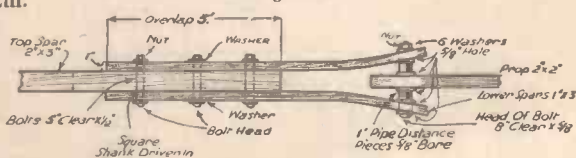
Details of the bolted overlap and pivot joint of prop.
